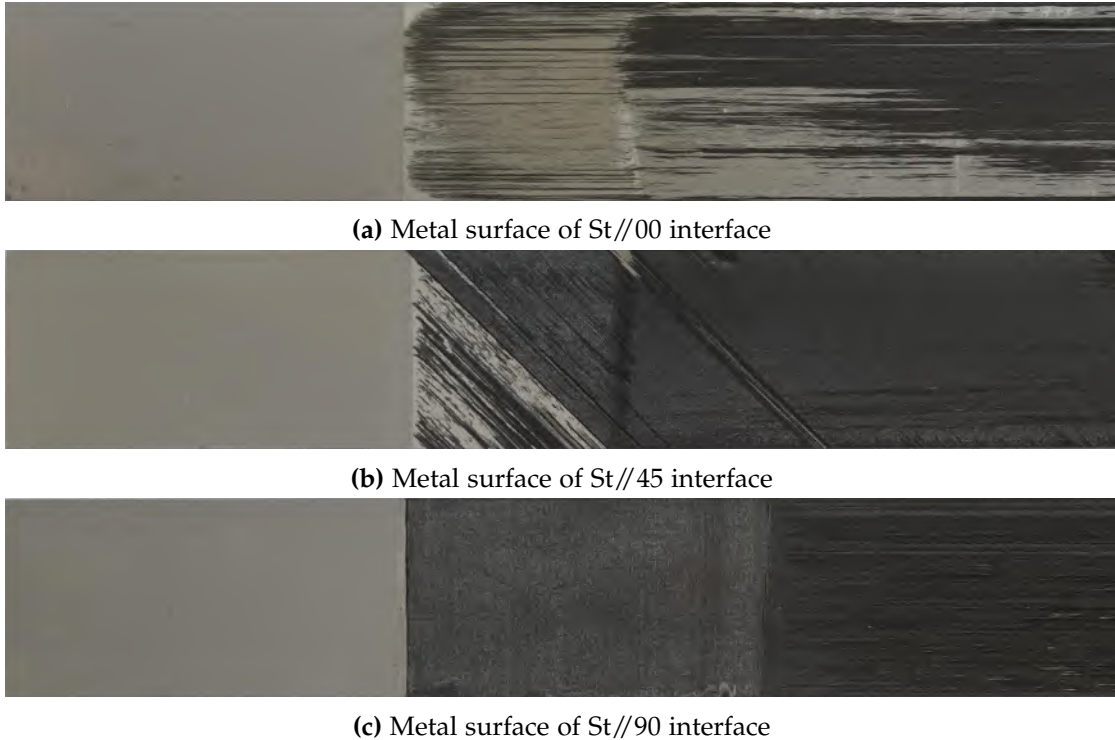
Fracture surfaces of hybrid ENF specimens
